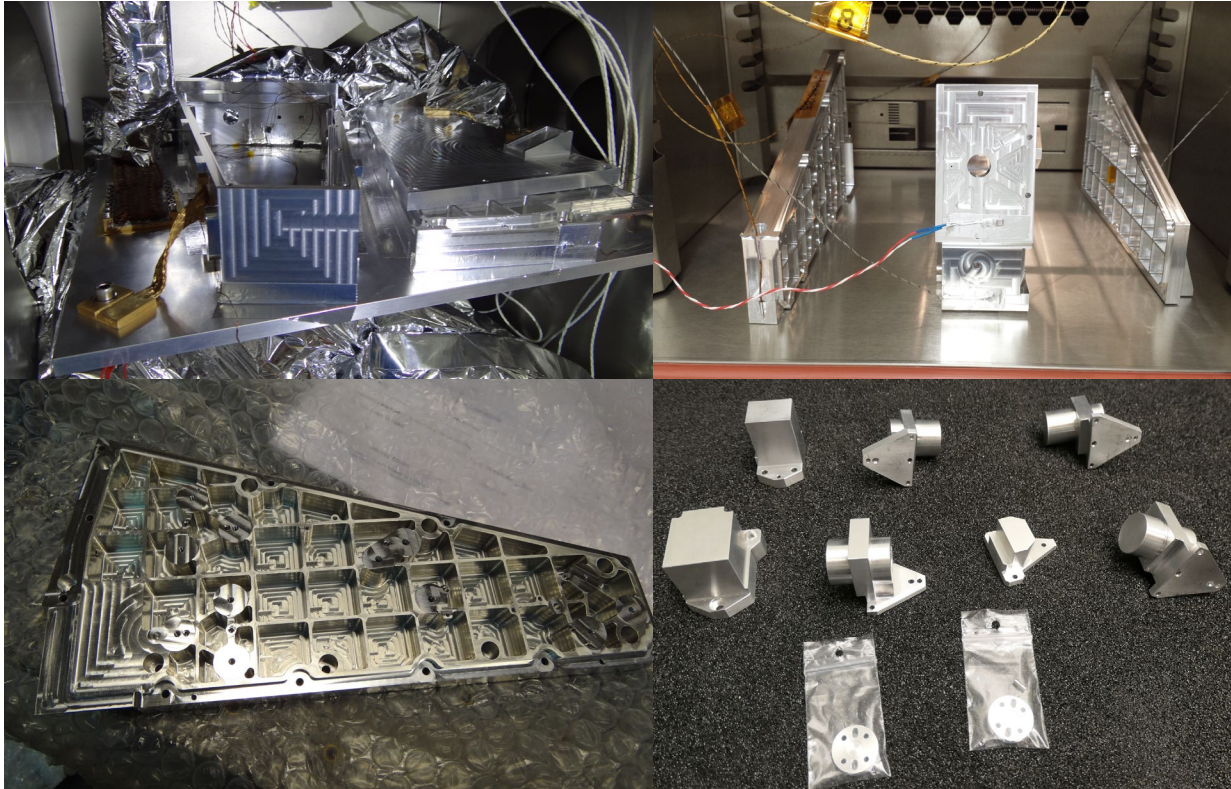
top left : STM structure part during stress relief cold cycle - top right : during hot cycle - bottom left : CH1 Optical bench after final machining - bottom right: optical sub-assemblies mass dummies for STM.
